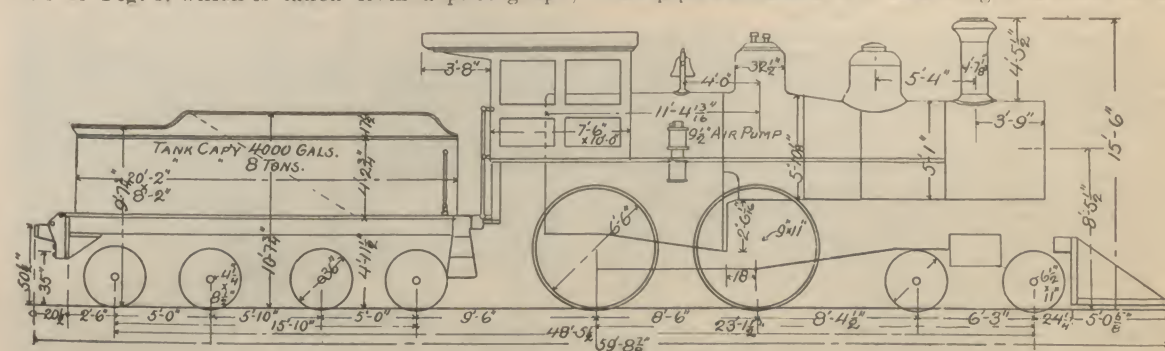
DIAGRAM SHOWING PRINCIPAL DIMENSIONS.
